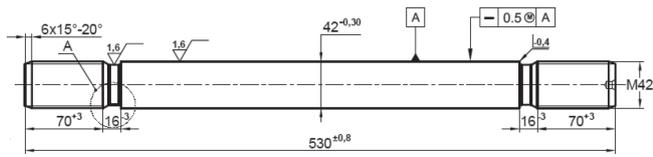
Schematic illustration of the testing specimen dimensions (mm)
